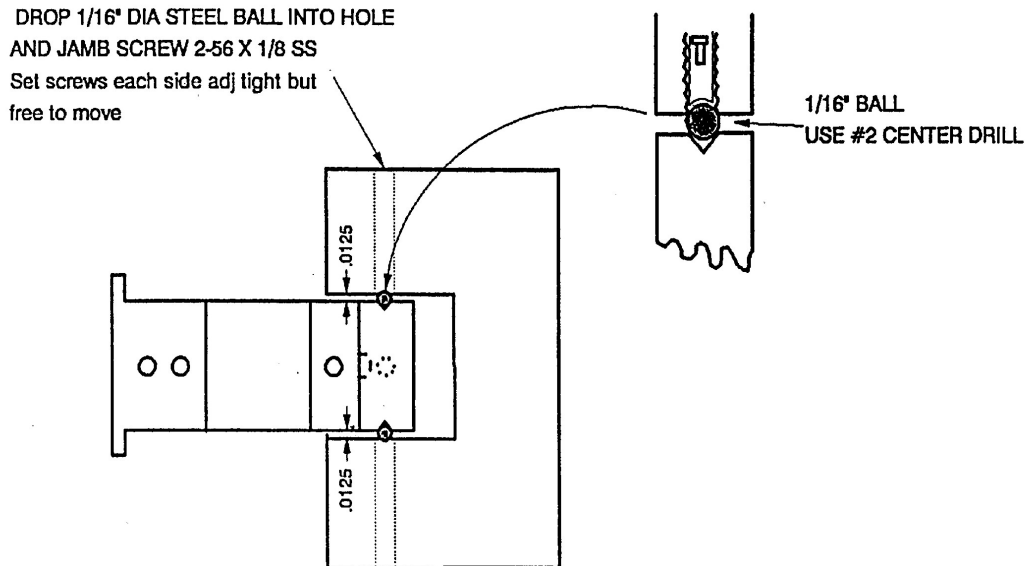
This drawing of the clamp assembly shows how the clamp arm is suspended by two stainless steel balls inside the clamp bracket, to allow for a smooth operation of the clamp arm.
